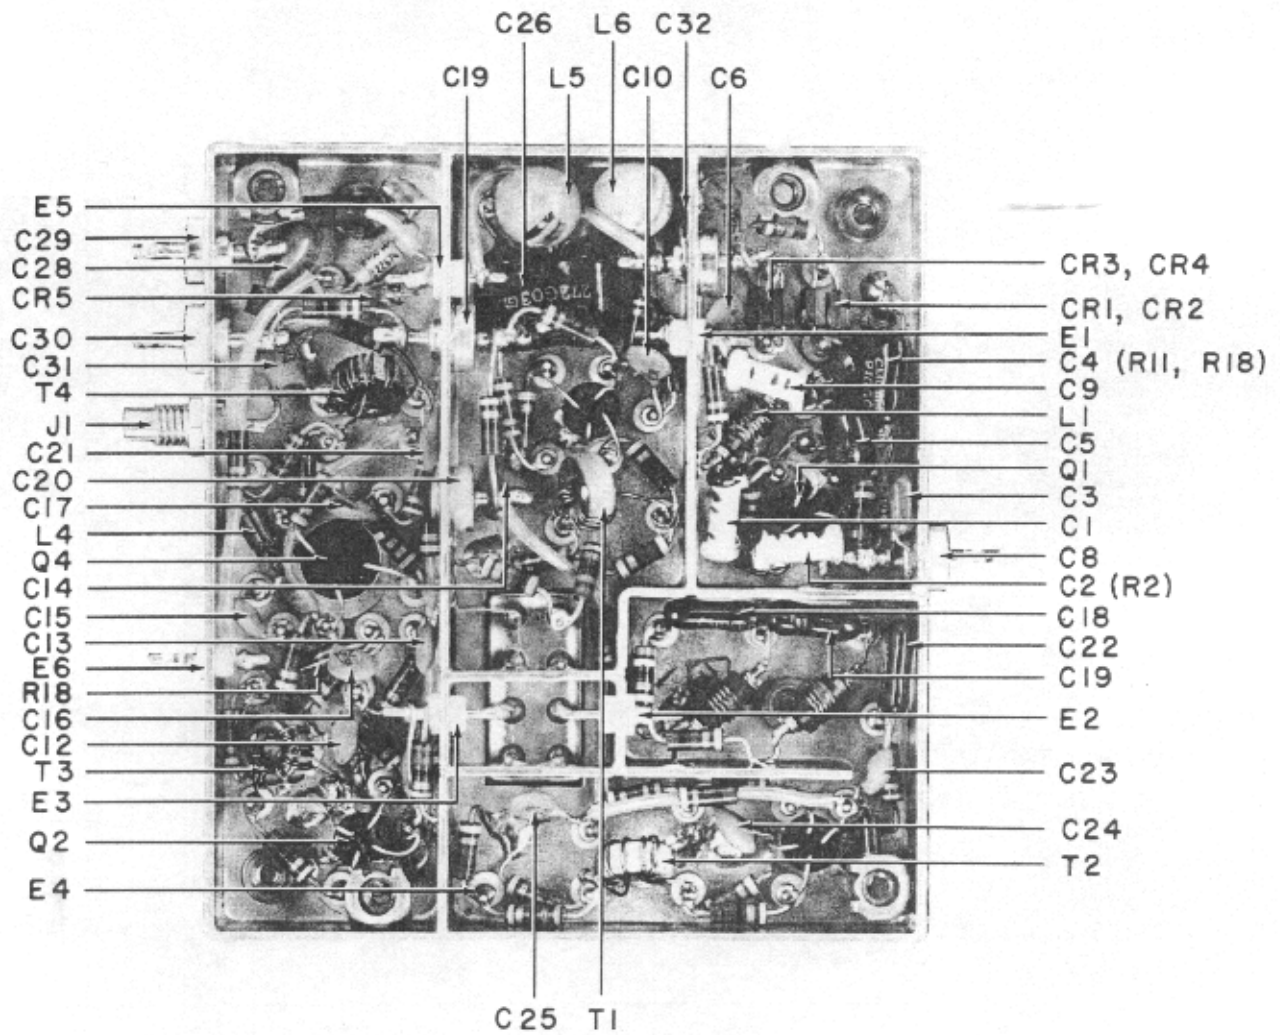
Part 17414 VCO Assembly (A15A1), Location of Components
